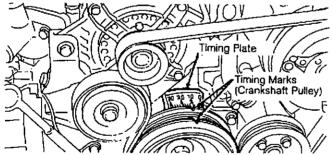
Locating 6-Cylinder Ignition Timing Marks Courtesy of Subaru of America, Inc.
